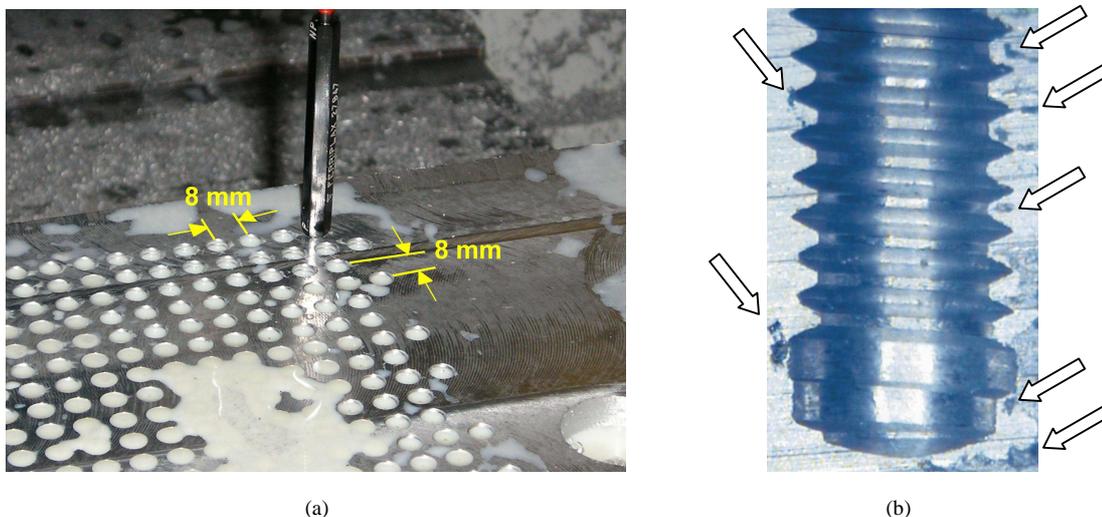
General view of the work material after machined some threaded holes (a) and transverse section of the machined work-piece after 5,691 threads holes (b). The details of the material porous are indicated by arrows.
